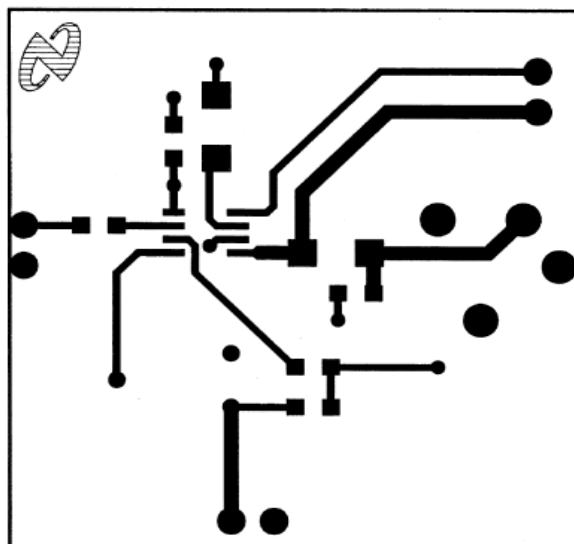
through Figure 6 show the recommended two-layer PC board layout that is optimized for the SO-8 packaged LM4865 and associated external components. Figure 7 through Figure 11 show the recommended four-layer PC board layout for the micro SMD packaged LM4865. A four-layer board is recommended when using the micro SMD packaged LM4865: the two inner layers, one connected to the GND pin, the other to the V_{DD} pin, provide heatsinking. Both layouts are designed for use with an external 5V supply, 8Ω speakers, and 32Ω headphones. The schematic for both recommended PC board layouts is Figure 1.
